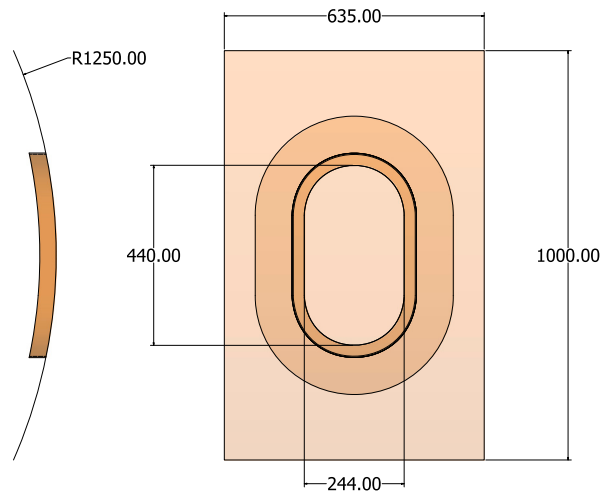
Detailed level window drawing design dimensions (mm) [6].
